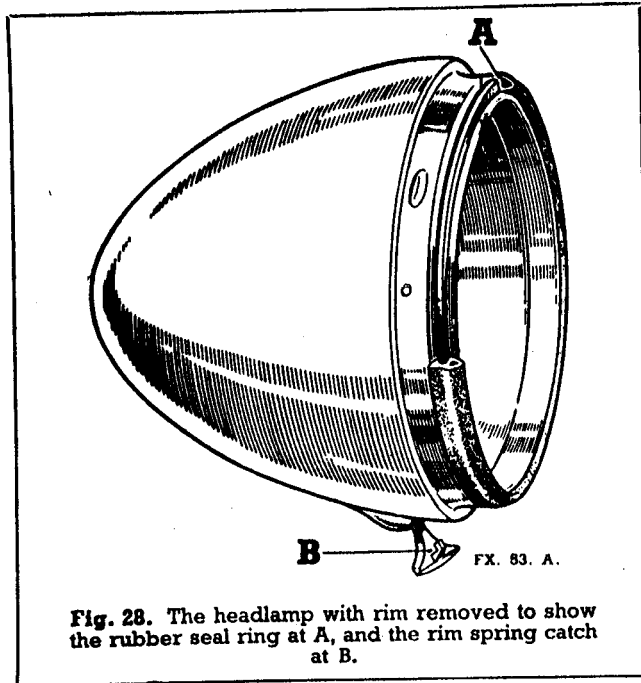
The headlamp with rim removed to show the rubber seal ring at A, and the rim spring catch at B.
